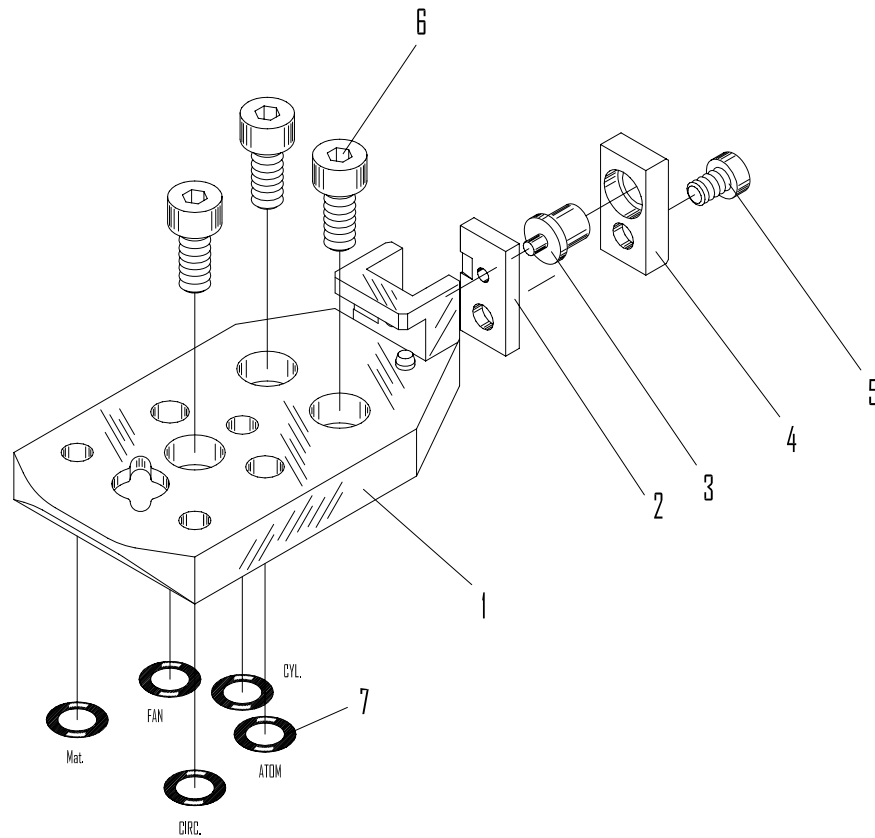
AGMD-245-1 Intermediate Plate Assembly Parts Identification
